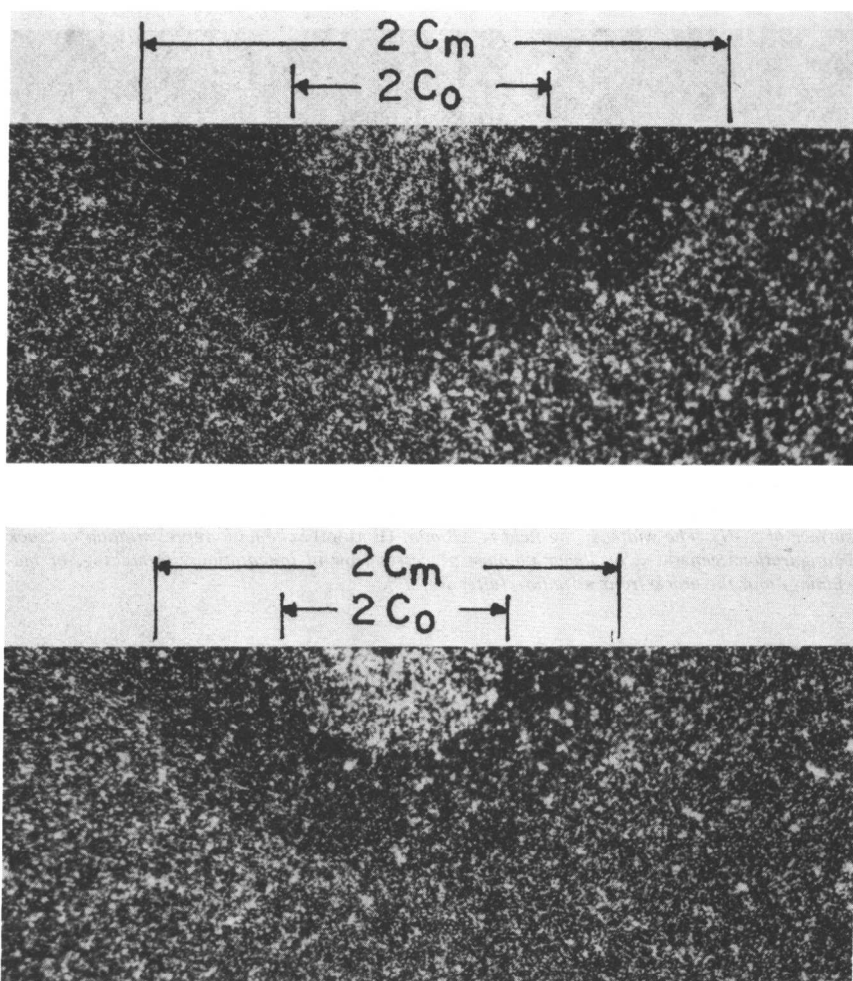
Fracture surfaces in Si_3N_4 (width of field $830\ \mu\text{m}$): (Top) Knoop indentation (50-N load) in a polished surface (specimen from Fig. 4b). (Bottom) Knoop indentation (50-N load) in a machined surface (after Ref 17).
